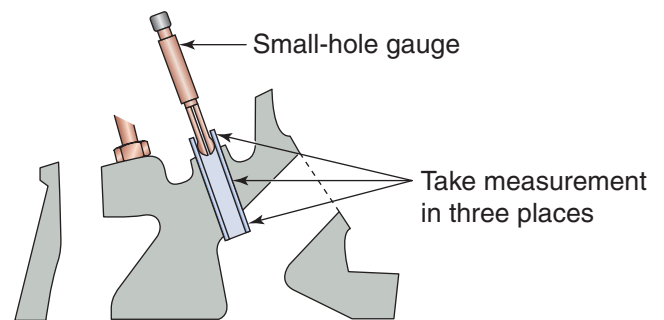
Measure the guide inside diameter at three locations using a small-hole gauge.
